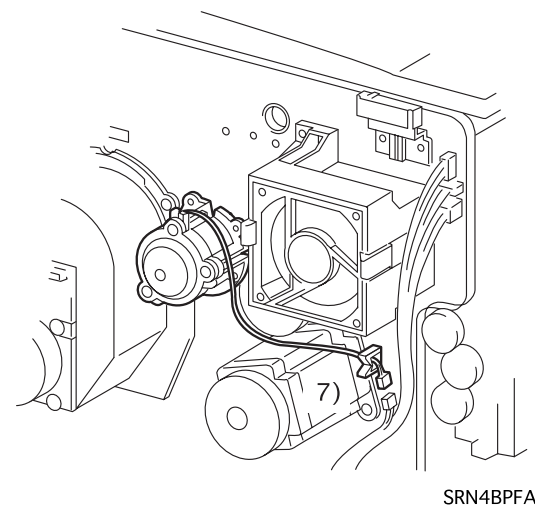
DEVE. CLUTCH ASSEMBLY Removal
